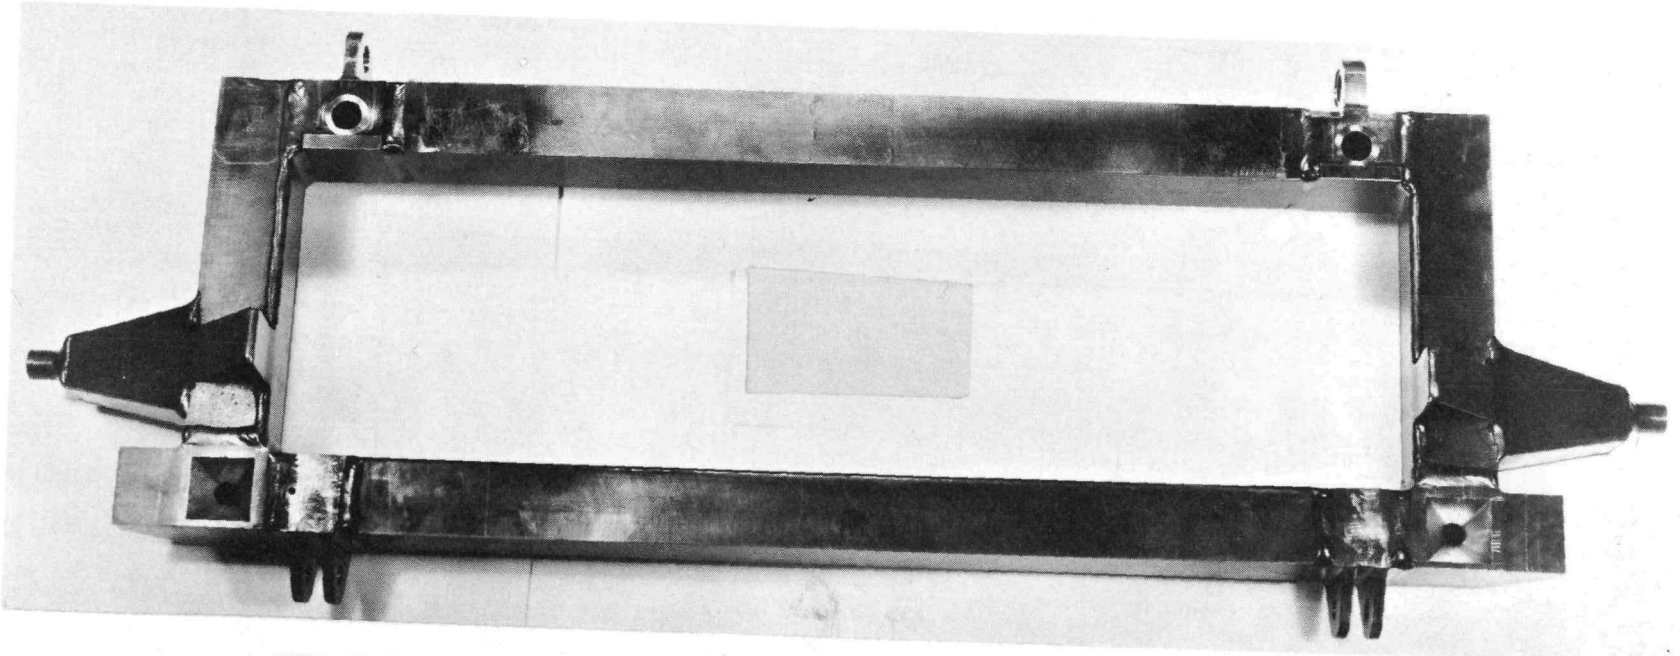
SIDE FRAME ASSEMBLY SHOWING HEAT SOURCE LOADING SIDE
